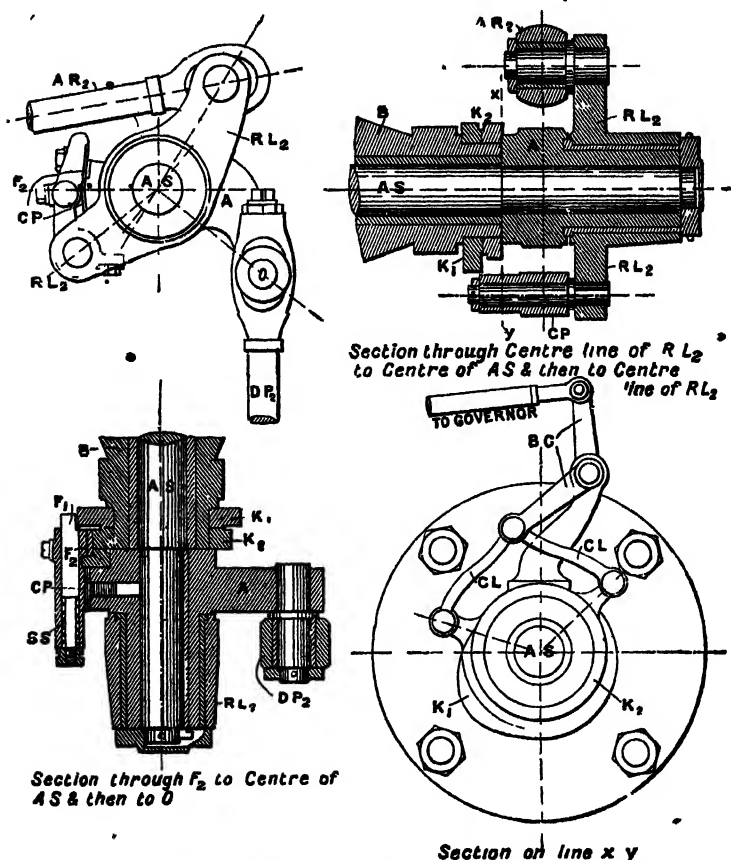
DETAILS OF FARCOT-CORLISS SINGLE ECCENTRIC TRIP VALVE GEAR.
